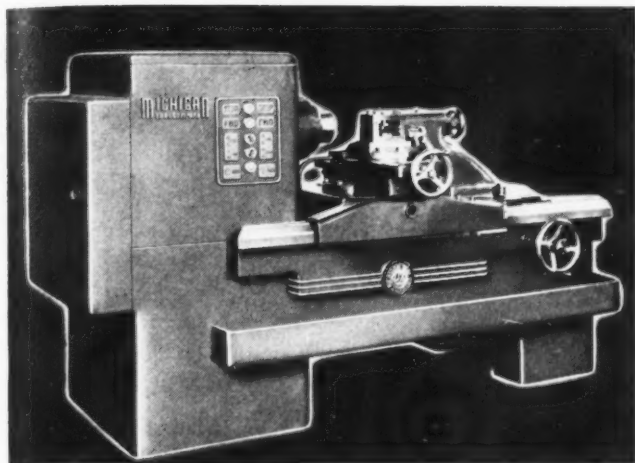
Cutter Relieving Machine Developed by Michigan Tool Co.
